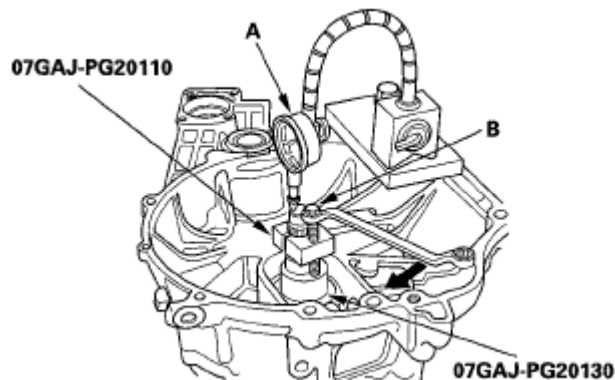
Measuring Mainshaft End Play With Dial Gauge
